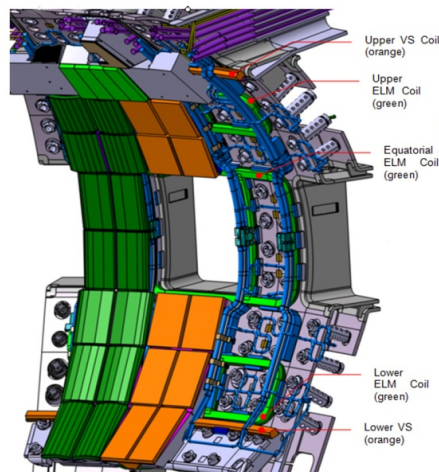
Blanket/shield coolant manifolds are mounted in front of the ELM coils
